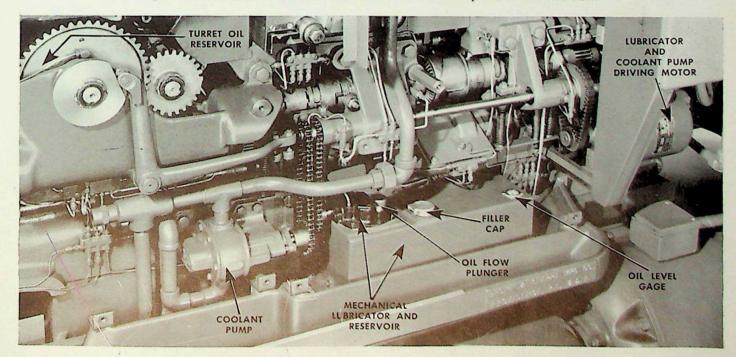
Rear of Machine with Guards Removed - Coolant Pump and Mechanical Oiler.
